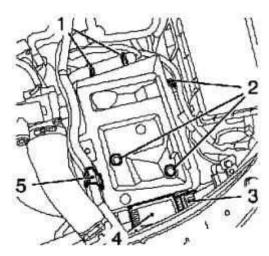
Removing the prelaunch heating: 1 - cable ties 2 mounting screws, 3 - the wiring harness connector, 4 - control unit heating system pre-launch, 5 - time
